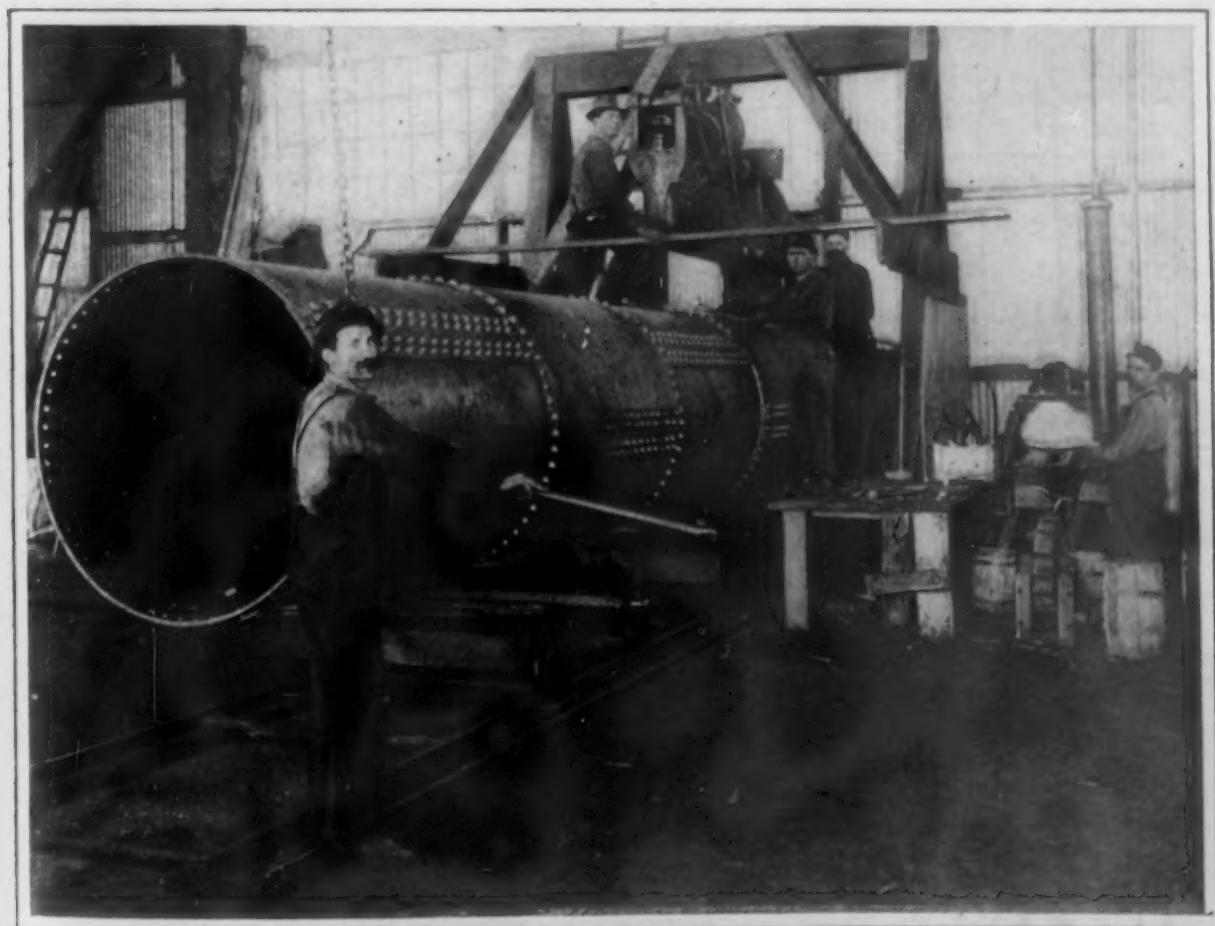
View in the Assembling Shop Showing a Pneumatic Riveting Machine at Work on 48-In. Pipe for a Penstock. The Plates Are $\frac{3}{4}$ In. Thick and Are Riveted with $1\frac{1}{4}$ -In. Rivets
